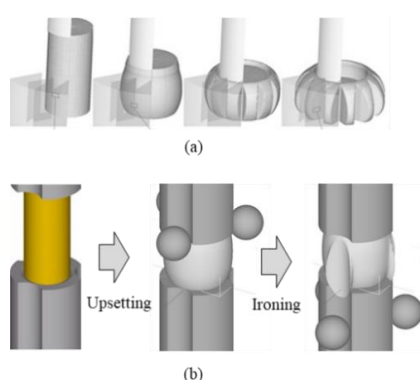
(a) Cold forging process of gear shaped parts and (b) an upsetting and ironing type tribotest
